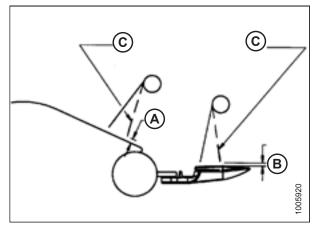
Reel Tine to Header Pan Clearance A - 2–10 mm (1/16–3/8 in.) Clearance
